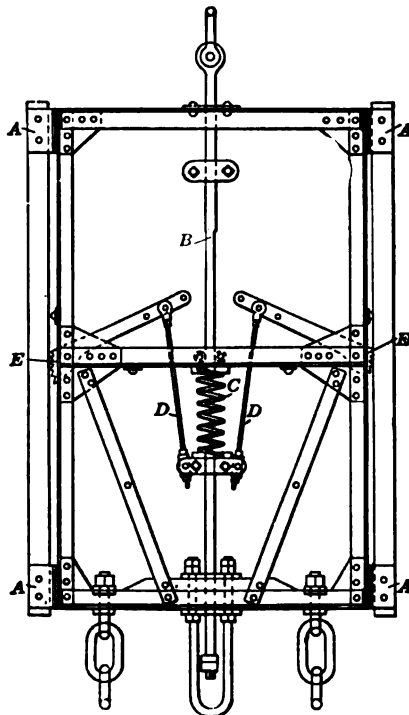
CROSSHEAD USED ON SINKING BUCKET IN MORNING MINE.
